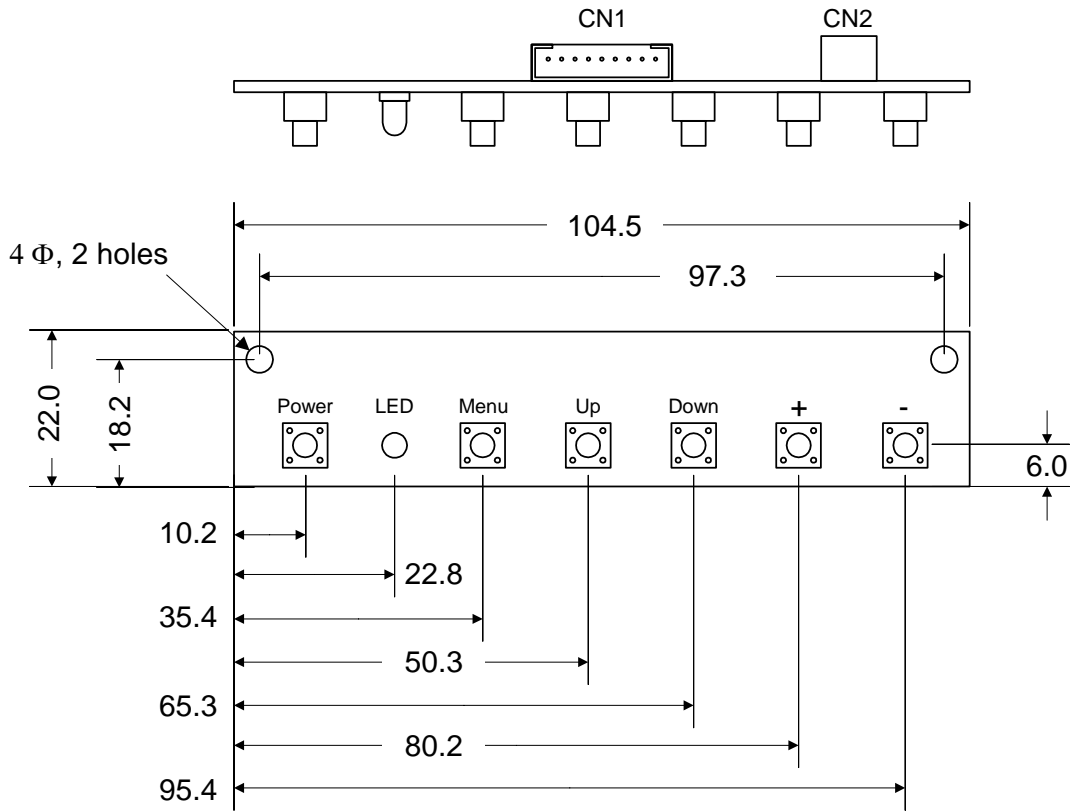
all dimensions are in mm with ± 0.5 mm tolerances
